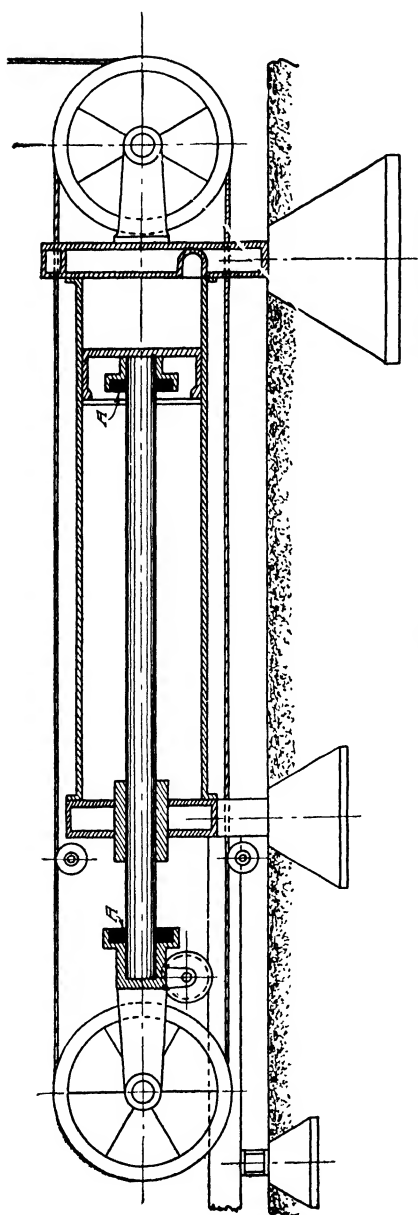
Details of Cylinder and Piston Arrangement of Crane Machine, Showing Rubber Bumpers
